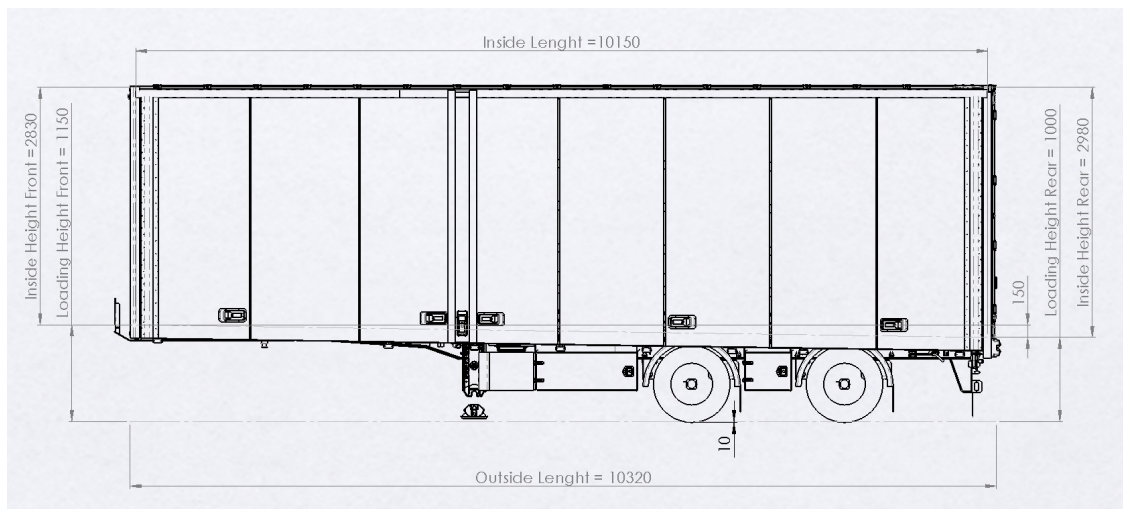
Shows the semi-trailer's specified dimensions regarding the loading height.
